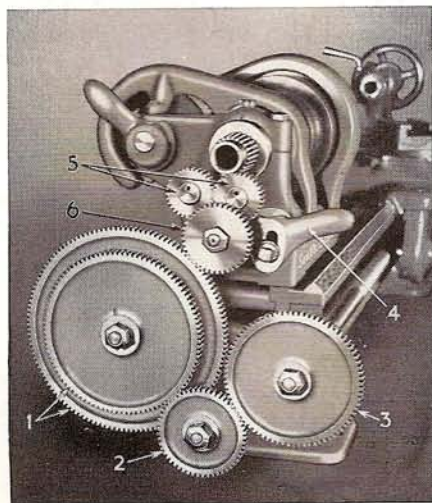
Lathe Set up for Cutting Metric Screw Threads
